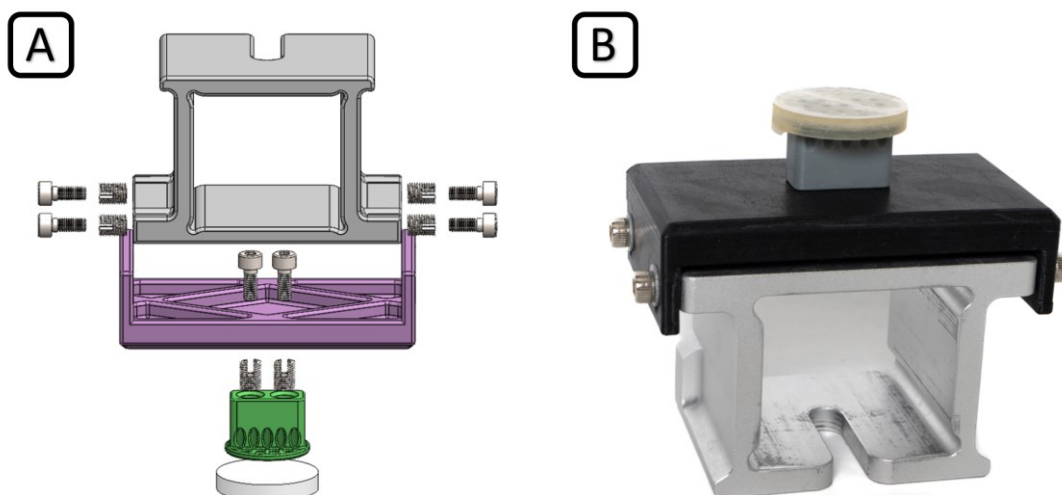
Updated version of the build platform. The custom-designed 3D-printed build platform was modified to fit the Phrozen Sonic Mini 8K printer. Exploded view of the CAD assembly, including threaded inserts and screws to fix the individual parts (A). Fully assembled build platform including mounted glass substrate (170 μm thick coverslip) on the silicone-coated platform (B).
